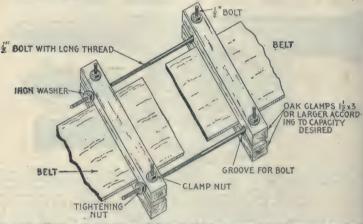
,803.—Home made belt clamp. It is made with four pieces of oak of ample size to firmly grip the belt ends where the bolts are tightened. The figure shows the clamp complete and in position on the belt and clearly illustrates the details of construction. In making the long bolts the thread should be cut about three-quarter length of bolt and deep enough so that the nuts will easily screw on.
